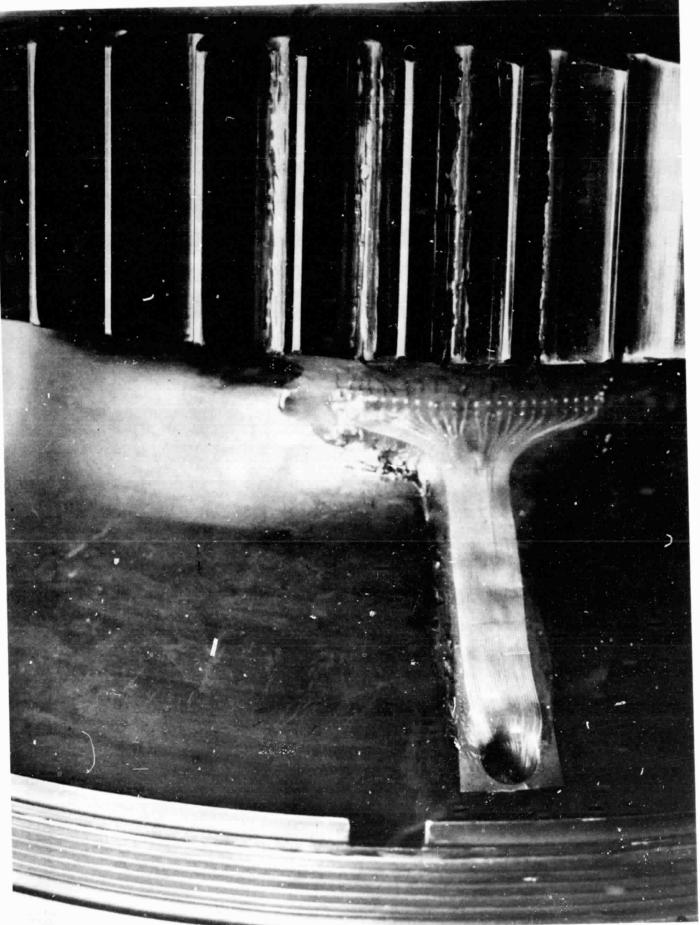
BEVEL GEAR GAGES IN SUN GEAR TOOTH ROOTS
